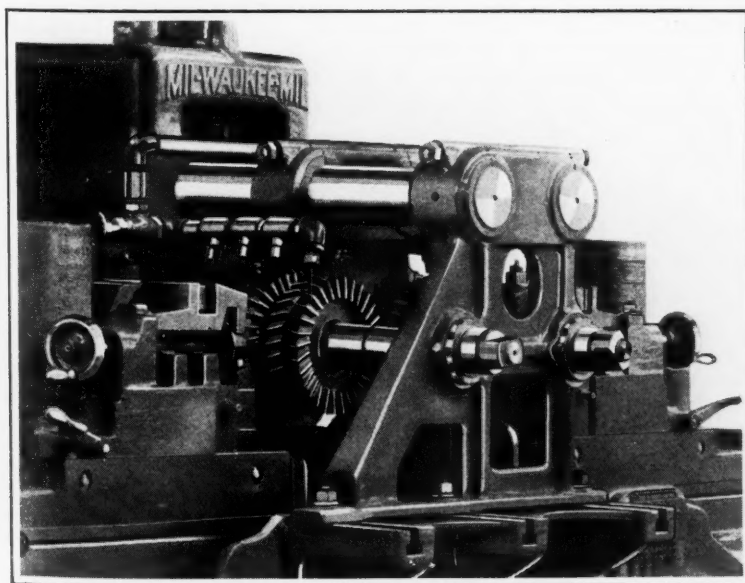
Two-spindle Set-up for Rough- and Finish-milling Bosses on Automobile Steering Spindles
